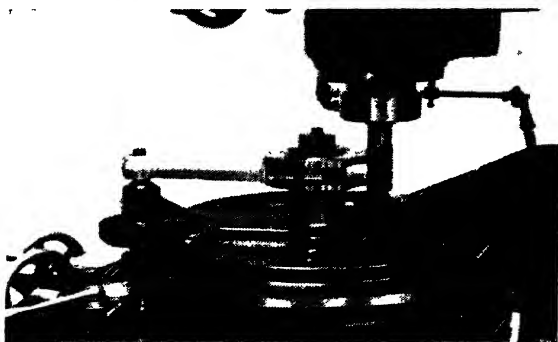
Form Milling using a Profile Cutter on a Vertical Milling Machine.
